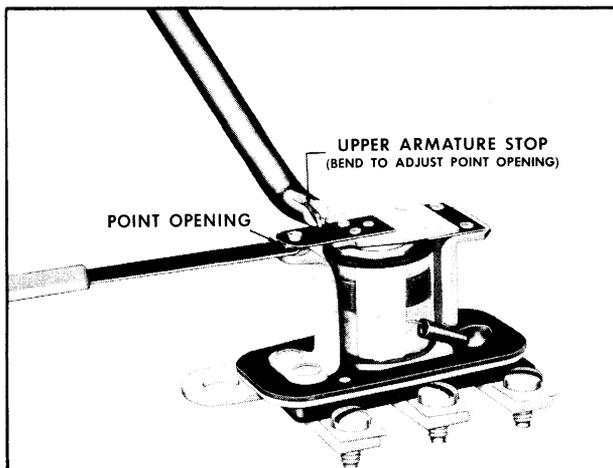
Adjusting Horn Relay Contact Point Opening
